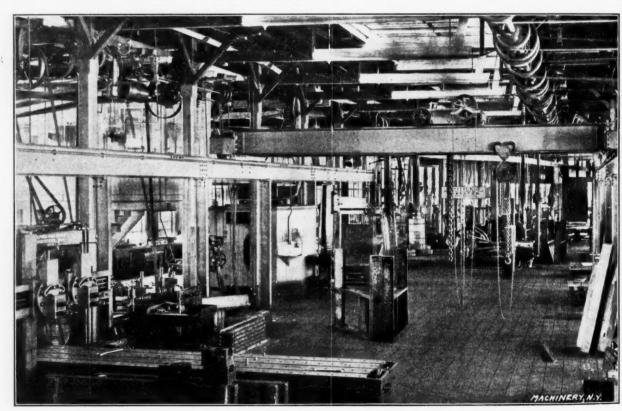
Fairbanks Machine Shop, St. Johnsbury, Vt. Taken with workmen passing and machinery running
